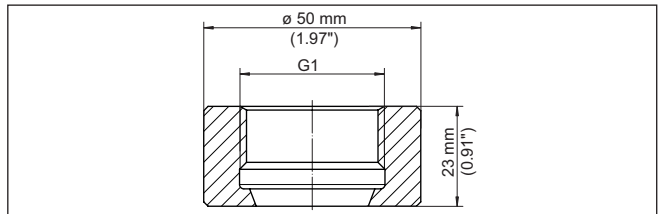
Dimensions welded socket G1 (ISO 228-1) - Cone seal
